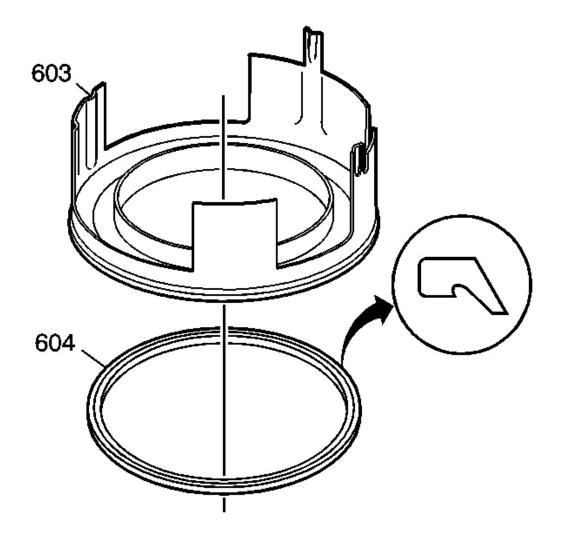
Locating Fourth Clutch Piston Outer Seal Courtesy of GENERAL MOTORS CORP.
